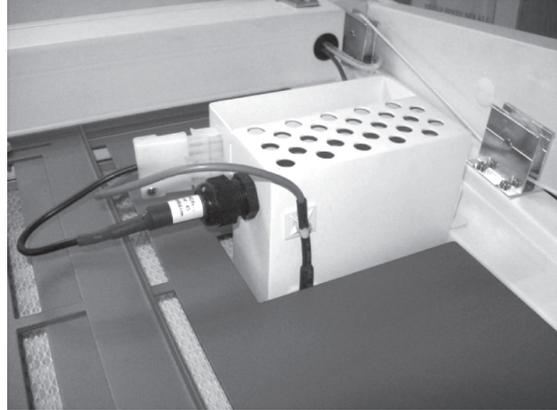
Secure the top part with thumb screw, that also passing through the slots on bottom part
